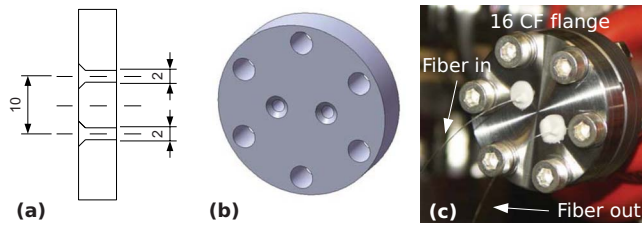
(Color online) Optical fiber feedthrough design: (a) Cross section of the DN16CF flange designed for a double fiber configuration. Dimensions are in millimeters. (b) Schematic of the modified DN16CF flange. (c) Illustration of the feedthrough sealed to our vacuum system.
